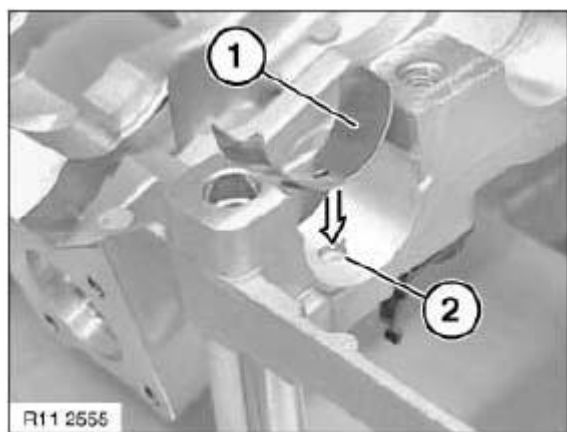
Inserting Bearing Shells Into Bearing Bracket
